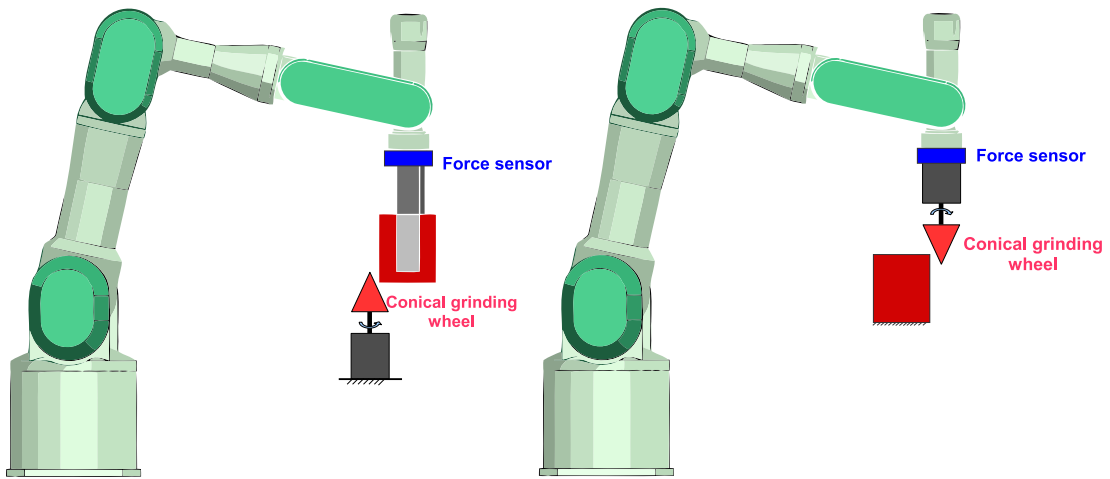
Experiment setups: robot carries the workpiece (left) and robot carries the grinding tool (right).
